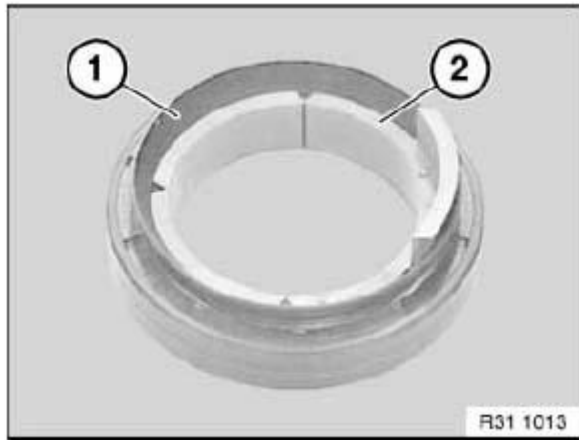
Identifying Protective Sleeve And Shaft Seal
